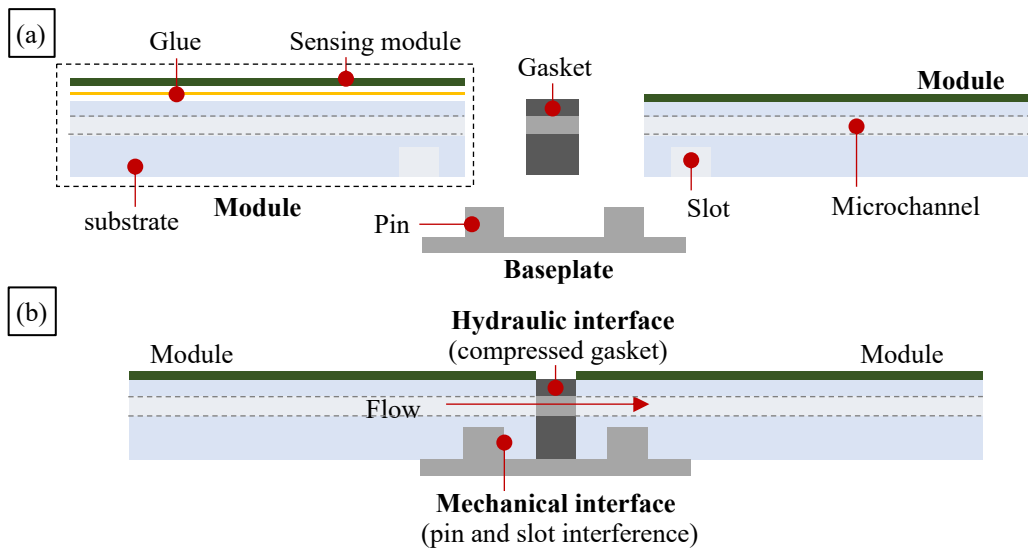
Interlocking modular concept. (a) Exploded view and (b) assembled view.
